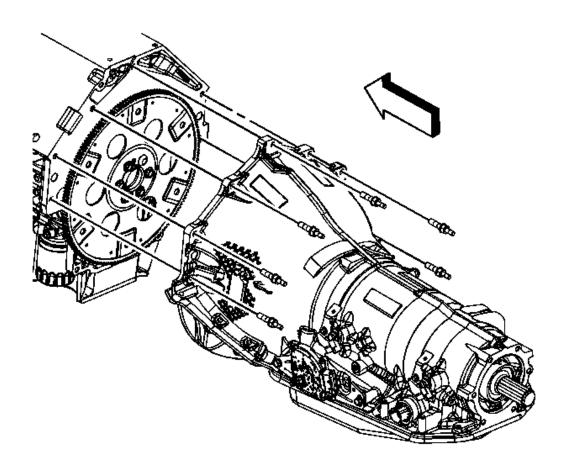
View Of Transmission Bolts/Studs Courtesy of GENERAL MOTORS CORP.
